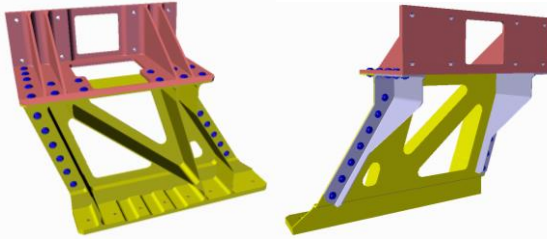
Original design of the 4 parts supporting bracket for the upper thruster pod in Aluminium alloy
